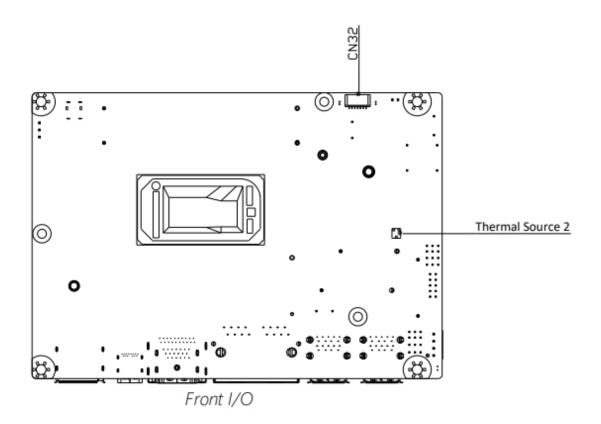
Jumpers and Connectors Location- Board Bottom
